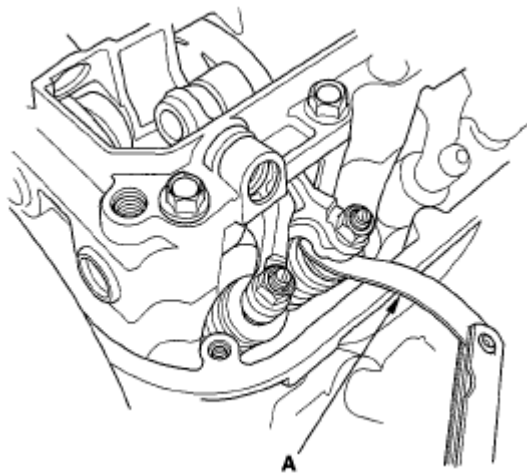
Inserting Feeler Gauge Between Adjusting Screw And End Of Valve Stem - Intake
